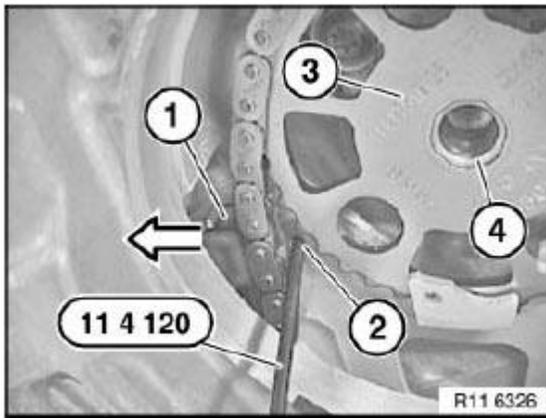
Pressing Timing Chain Using Chain Tensioner
